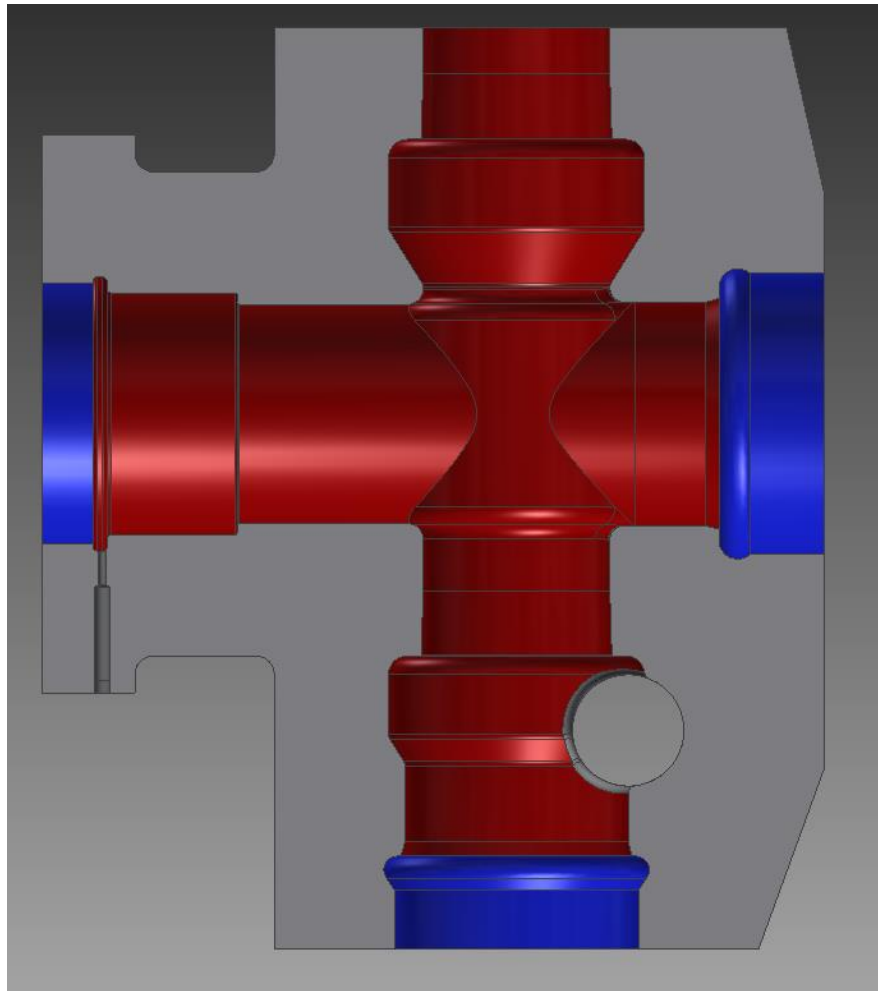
Internal fluid end geometry - Potential to clad all internal surfaces of fluid end.
